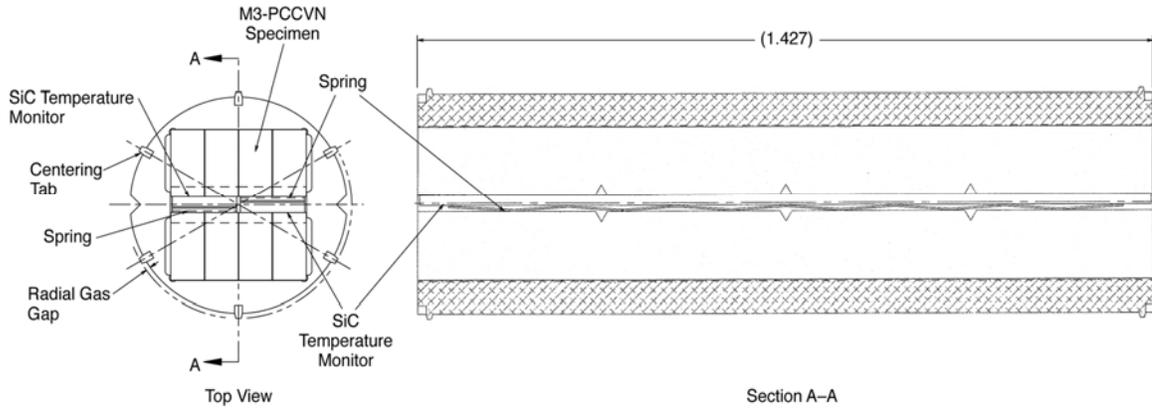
Specimen holder subassembly used in JP-27 for M3-PCCVN specimens.
